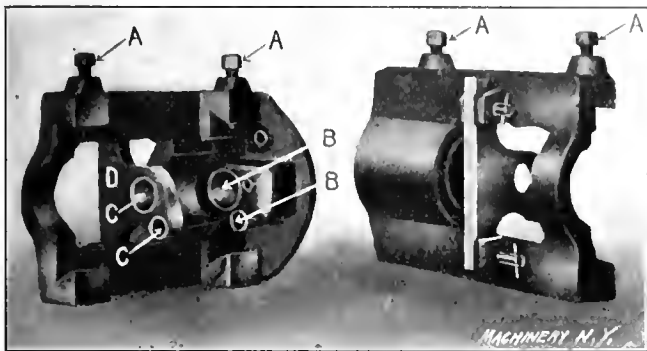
Example of Small Boring Jig, with Removable Leaf for Holding Guiding Bushings.
